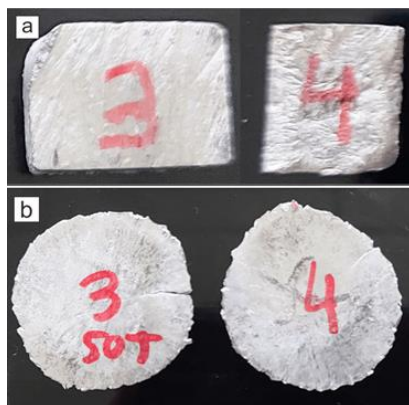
The sample of Al-Si composite. (a) Before forging; (b) After forging.
